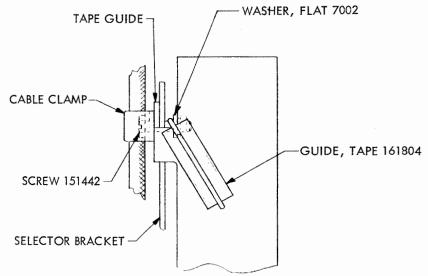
TAPE GUIDE MOUNTING FOR AUXILIARY REPERFORATOR
